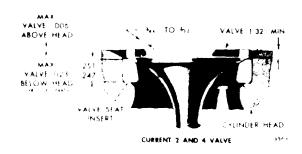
B-61. Relationship of New Valve, Insert and Cylinder Head
